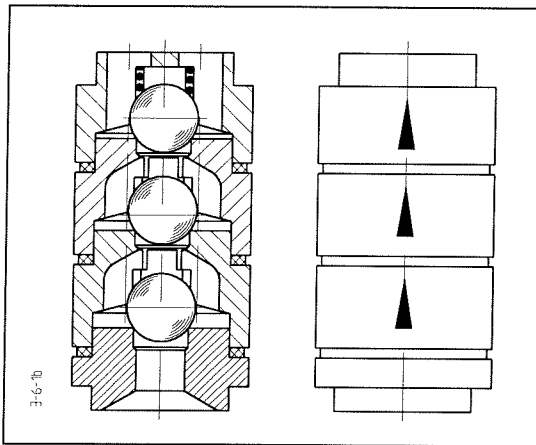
Triple Ball Valve - Sectional and Plan View
